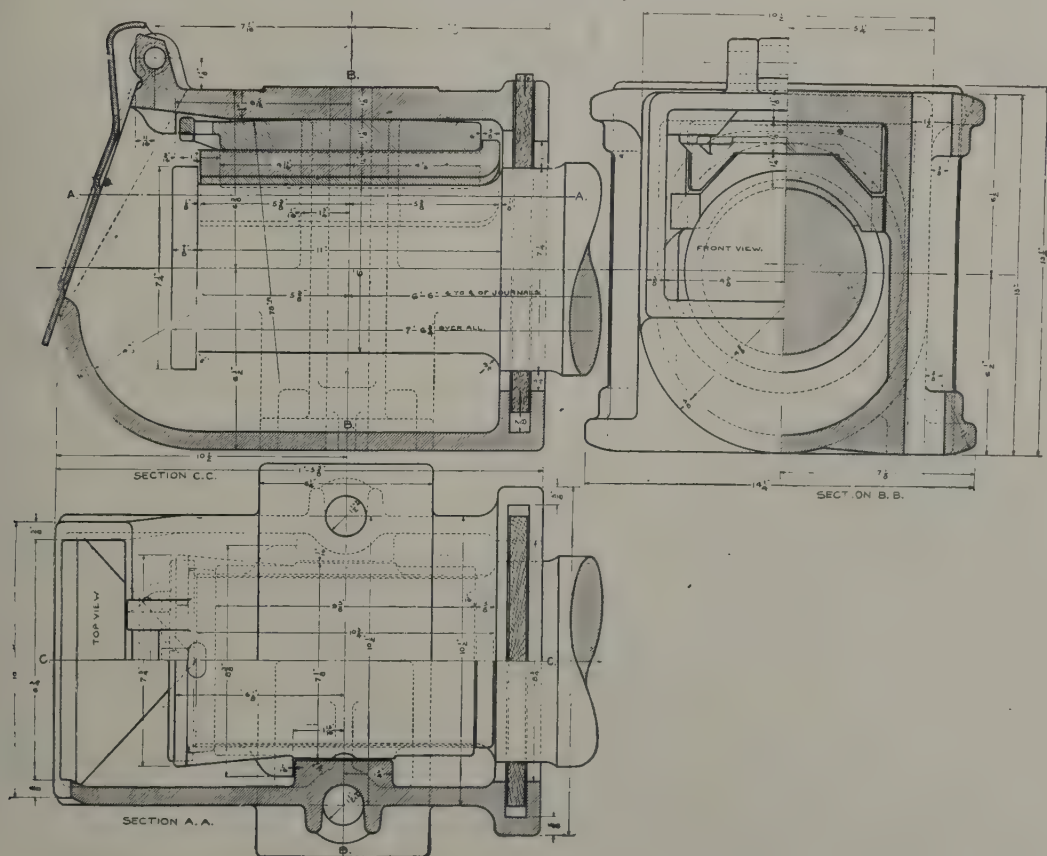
M. C. B. Standard Box and Contained Parts for 6 in. by 11 in. Freight Car Journal.
